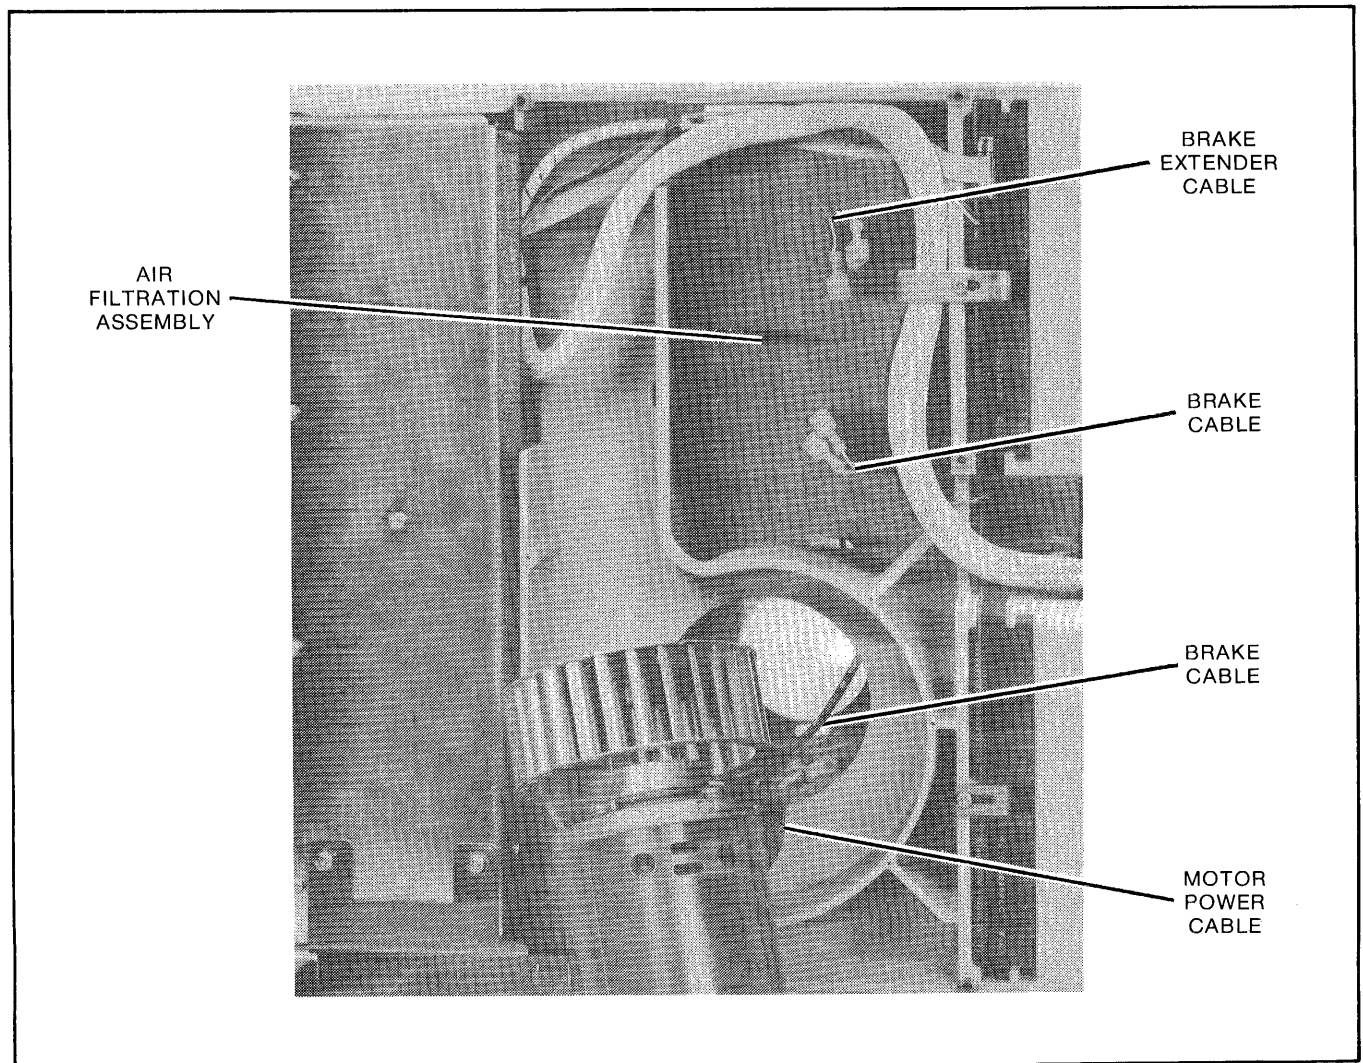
Disc Drive Motor Power and Brake Cable Routing
